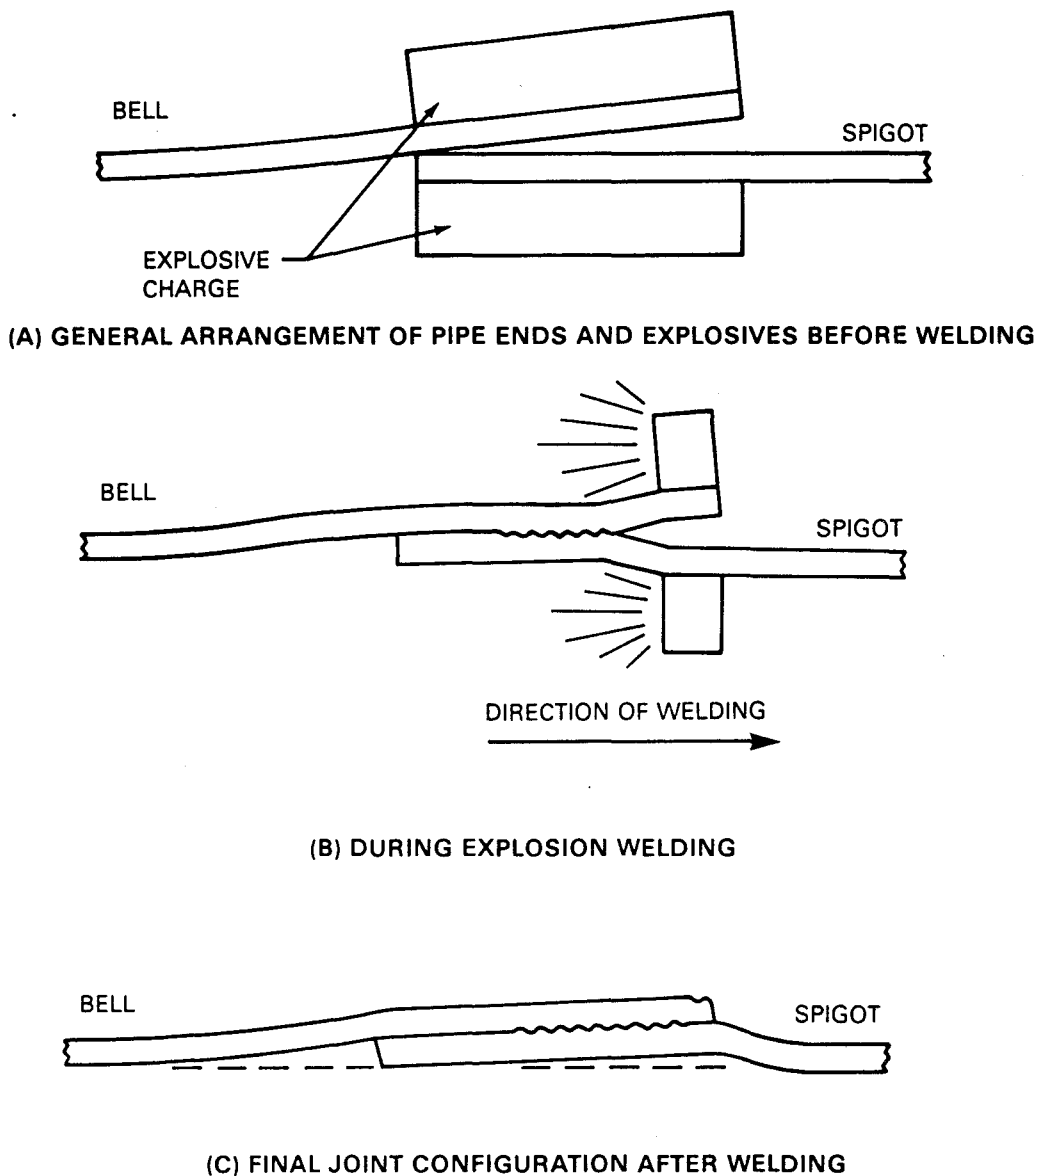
Schematic of Explosion Welding of Girth Joint in Pipe
